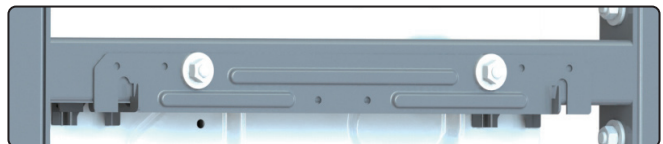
Secured Top Mounting Bracket for Back to Back Appliance Mounting
